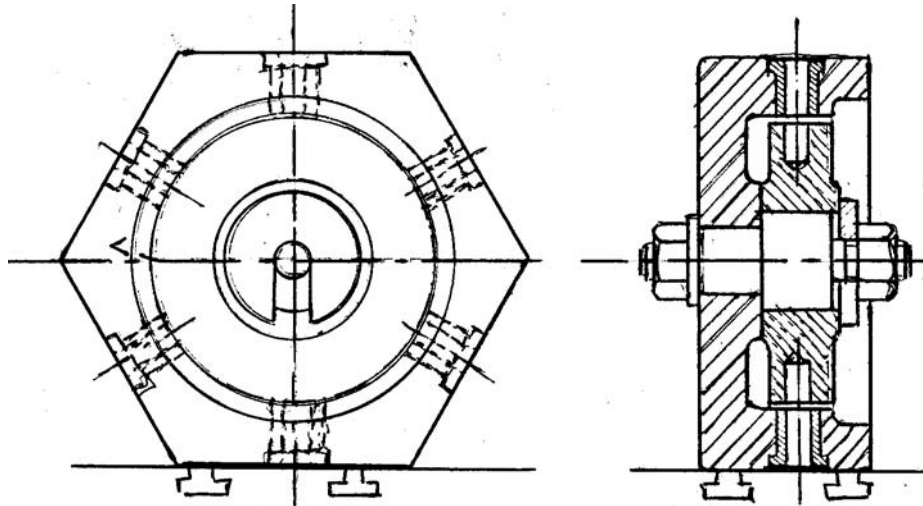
Jig for drilling six equispaced radial blind holes in a disc.
